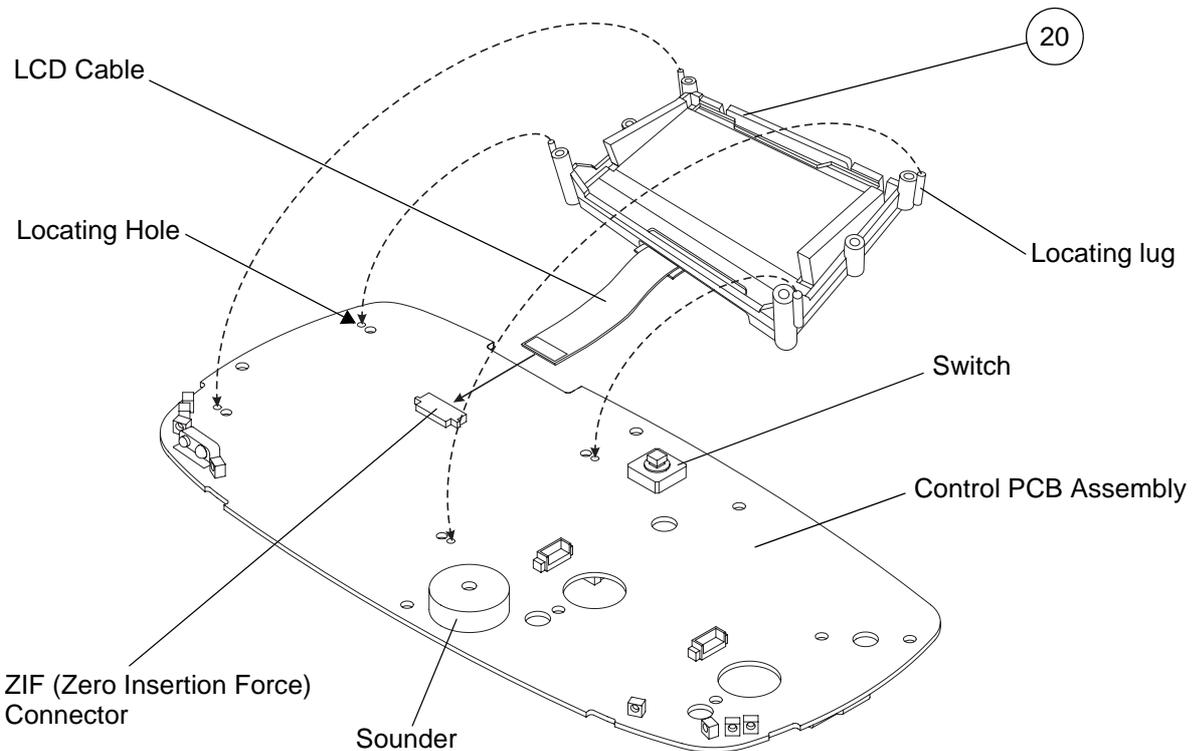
Installing the LCD Sub-Assembly onto the Control PCB Assembly
